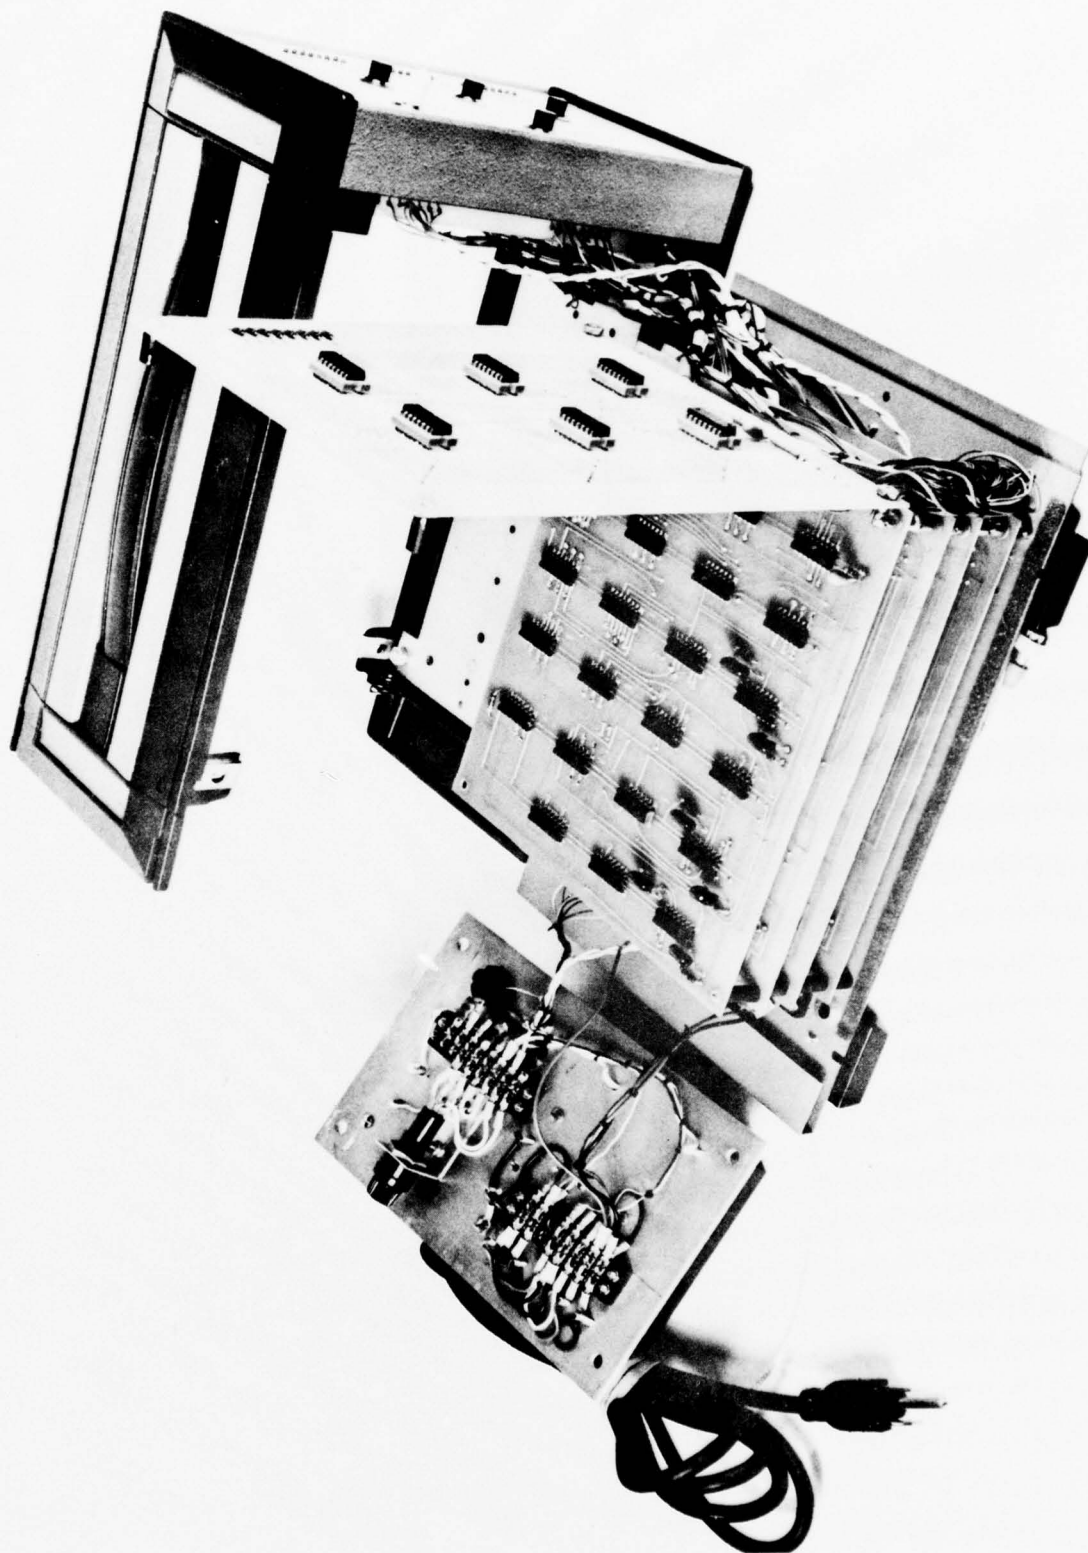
SSRD ASSEMBLY, VIEW 1
